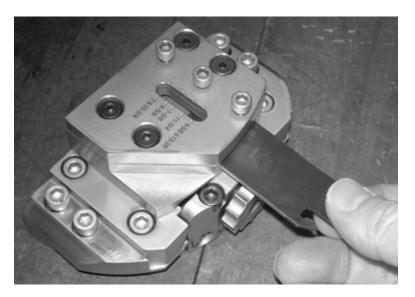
Insert the tool into the slide with the engraved red line up.
